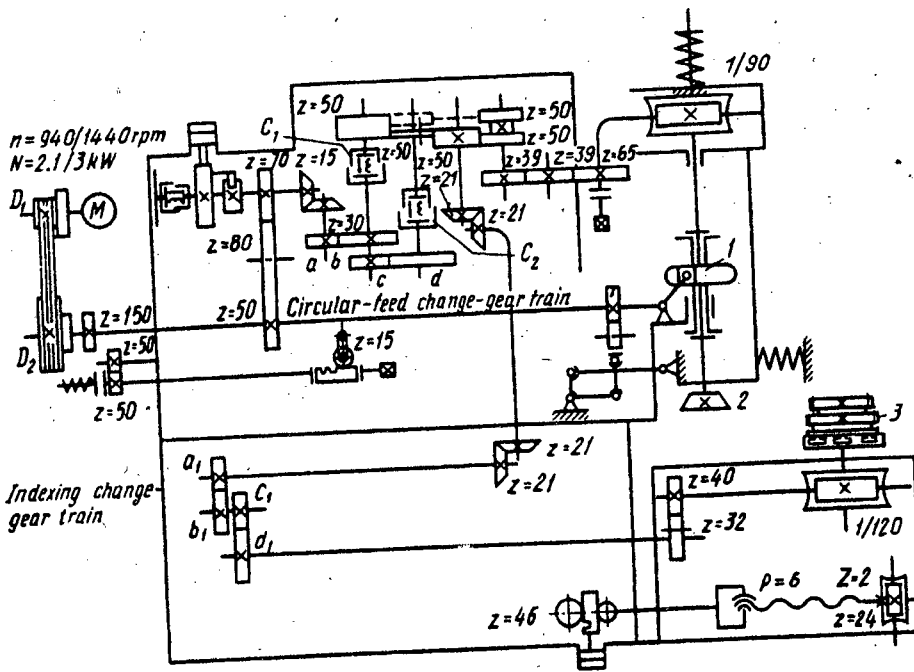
Kinematic diagram of the model 5122 gear-shaping machine
